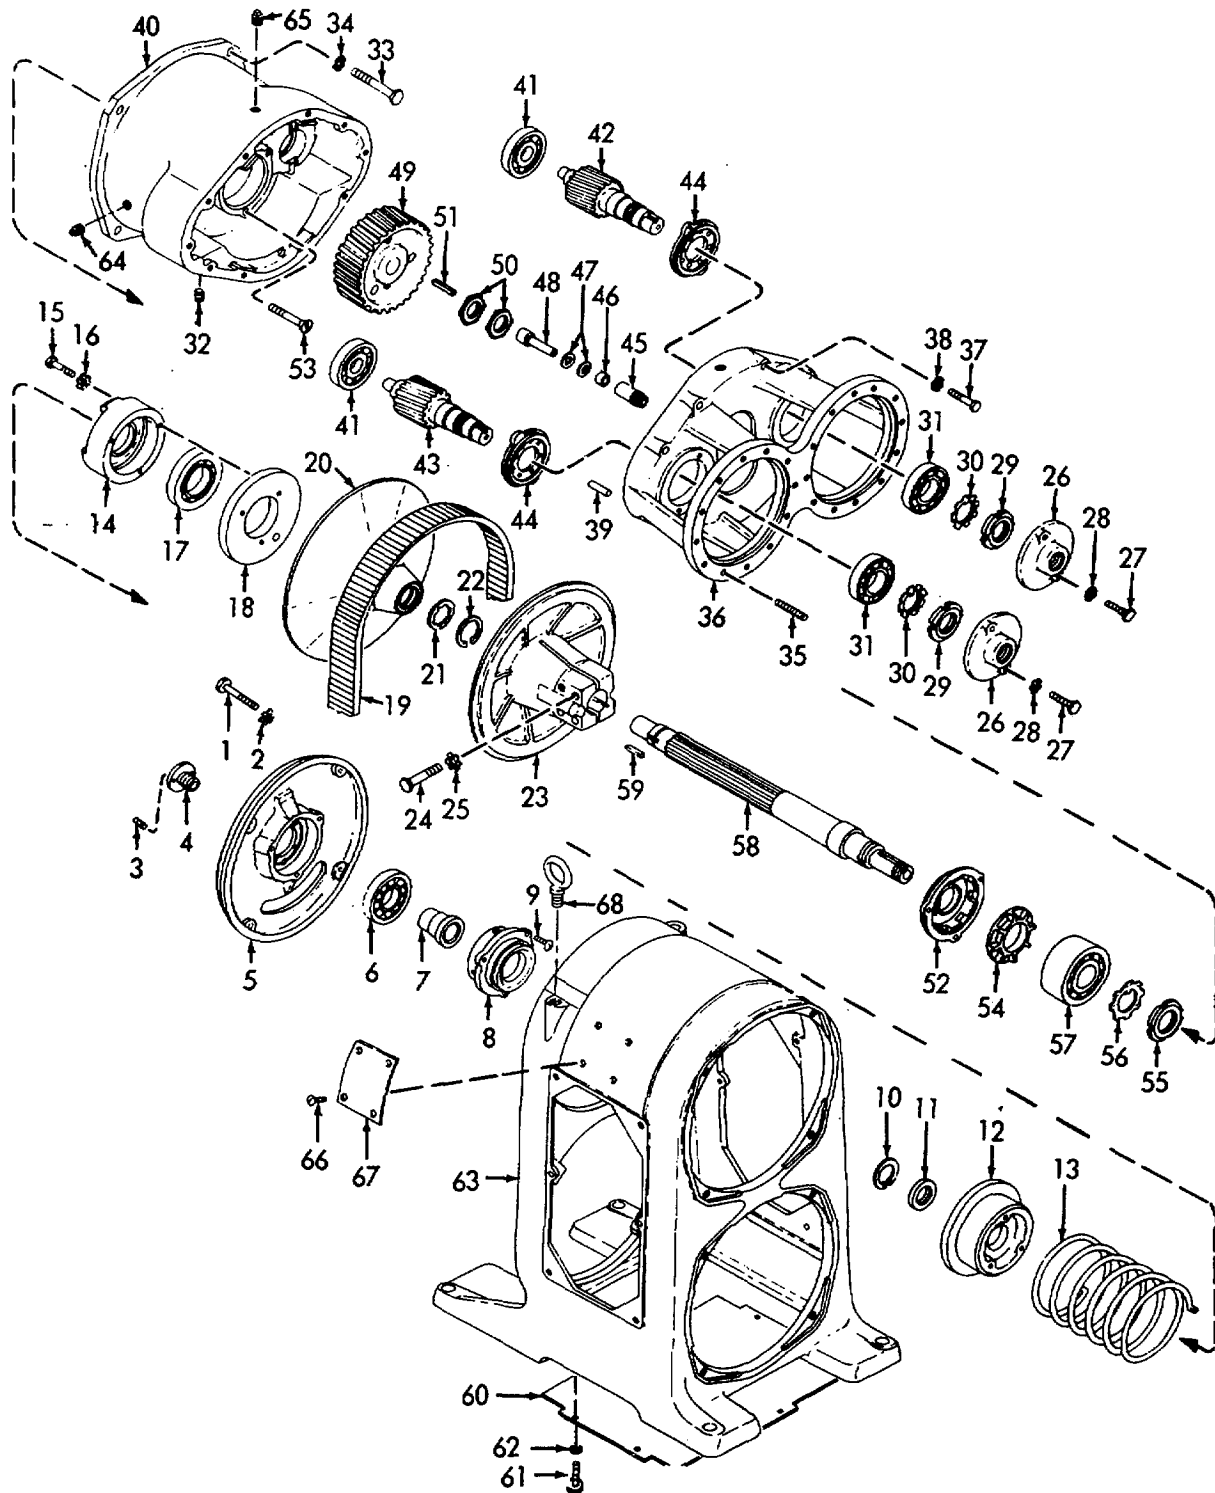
Gearcase, driven shaft, and case frame, exploded view.
